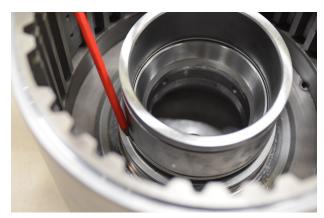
install clutch piston ring and expander after assembly apply grease after assembly apply grease on piston ring
